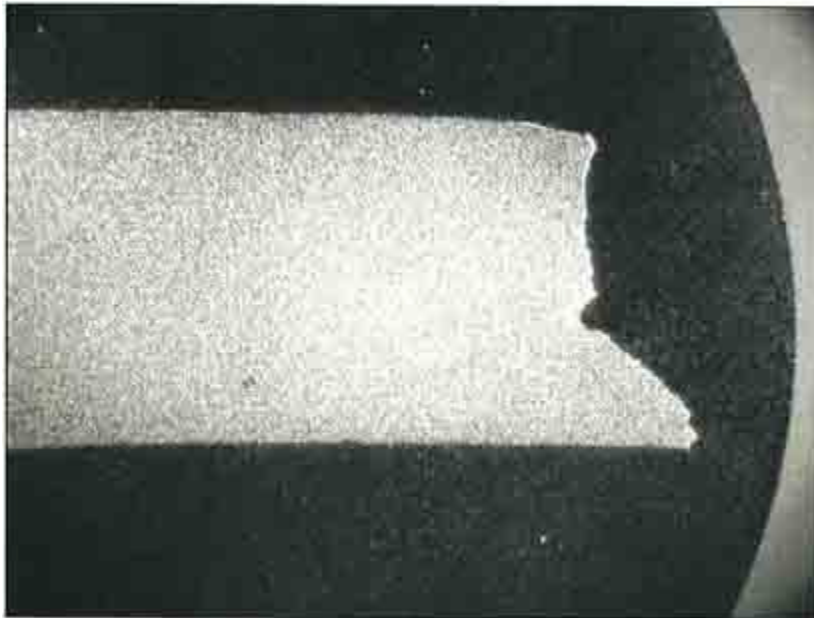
Photograph at 8x showing the thick wall fracture surface profile; 2% nital.
